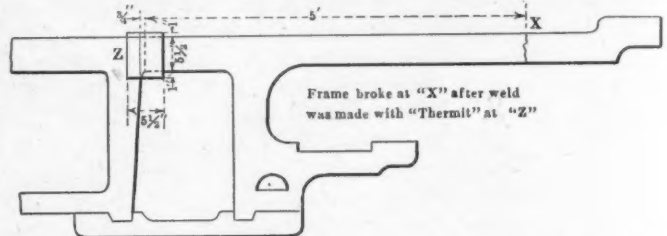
LOCOMOTIVE FRAME SHOWING FRACTURE WHICH WAS WELDED BY THERMIT.
